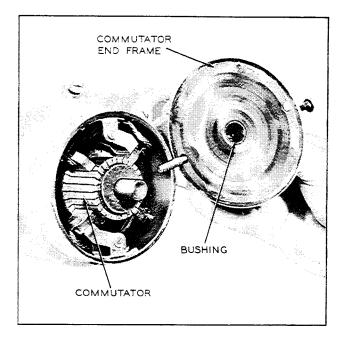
End Frame Bushing Lubrication-Typical Starter
